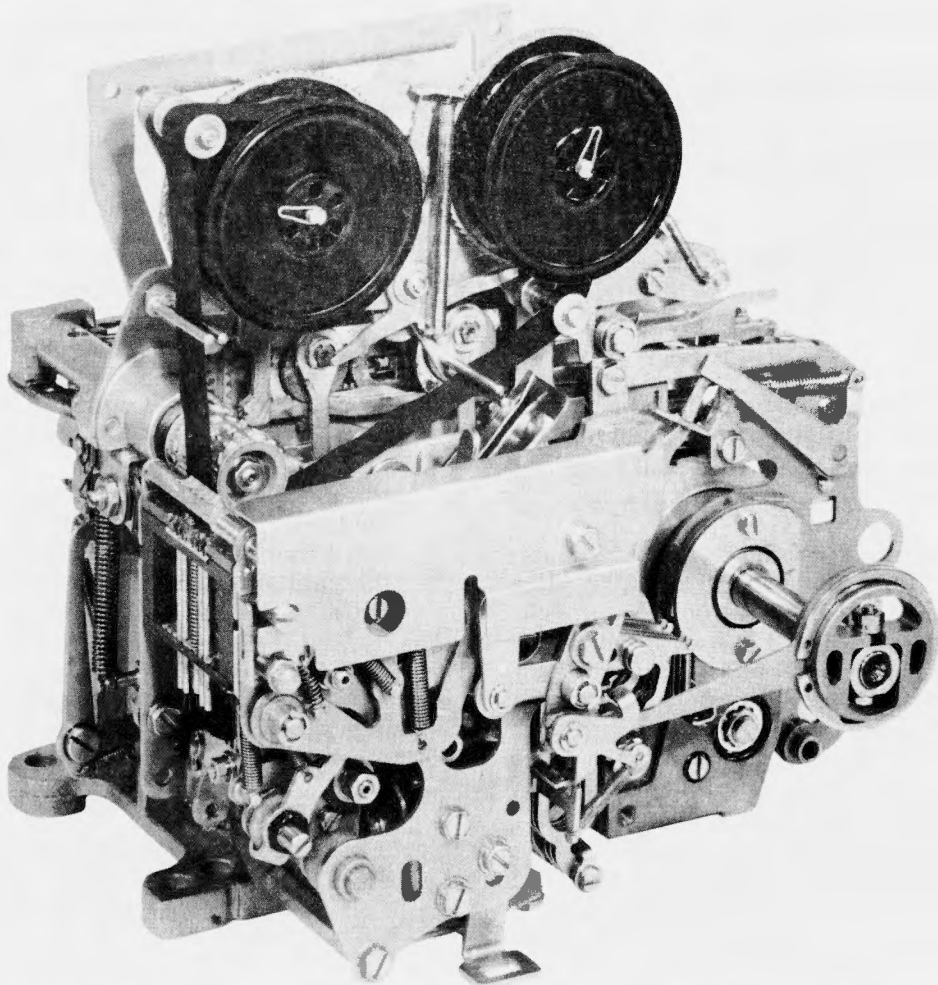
28 Typing Perforator - Chadless Tape (With Backspace Mechanism)
